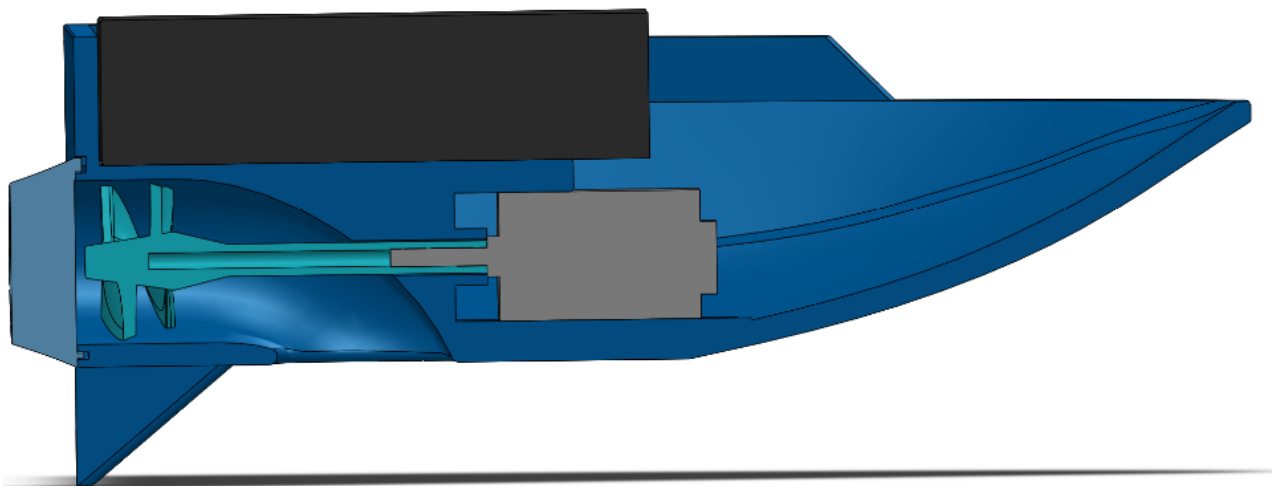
Final boat design, section view. Notice the final assembly of all components and in particular the motor-shaft connection. It has been decided to create a longer channel to prevent the water to enter the hull. As regards dimensional issues, in order to correctly couple hull and shaft, has been decided to have a 0,4mm gap between the two diameters, preventing the water entrance but avoiding too much friction. To reduce printing times, the shaft is hollow.
